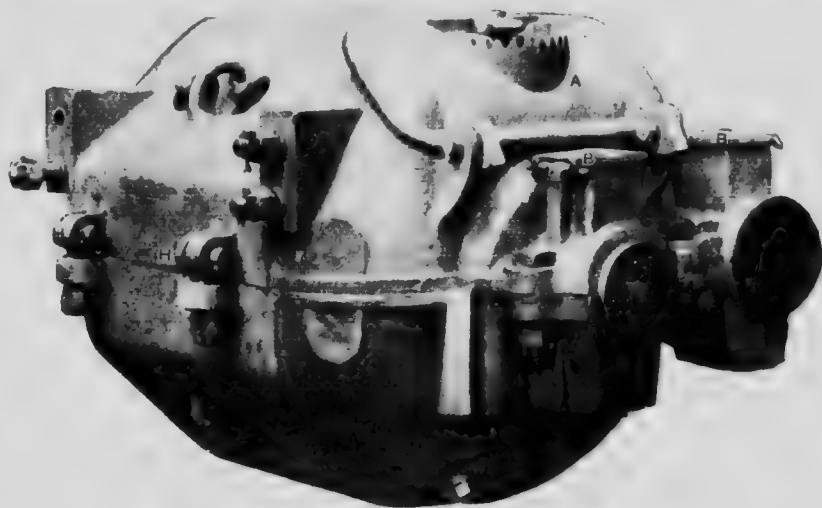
Brush Electrical Engineering Company's Tramcar Motor.
